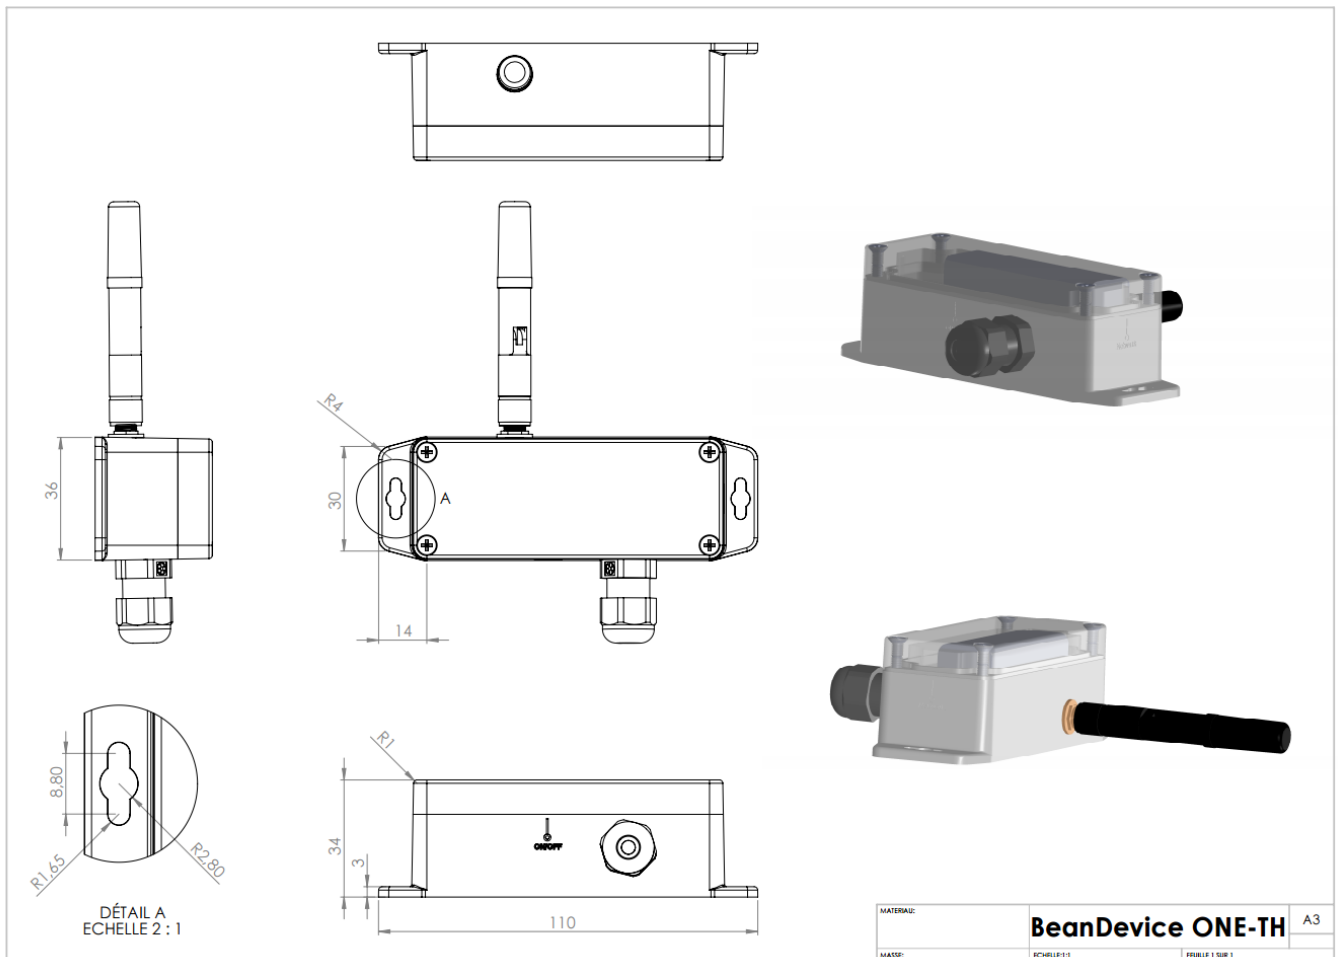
BeanDevice® ONE-TH/ONE-TIR/ONE-BN Mechanical drawing
